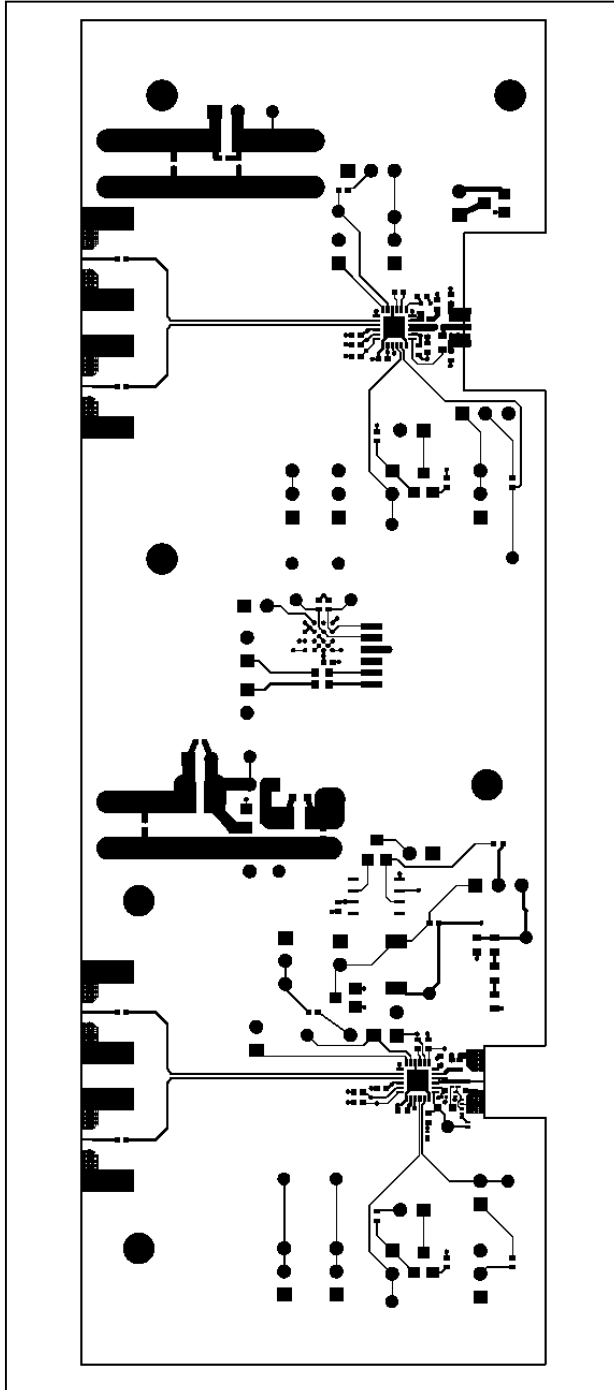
MAX3735A EV Kit PC Board Layout—Component Side
